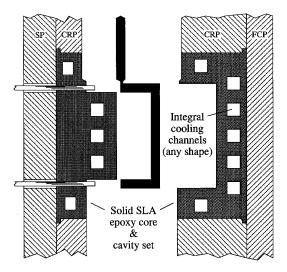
Solid epoxy cavity/core insert set produced directly with the SLA process. Cooling channels of various geometry and ejector pin holes can be incorporated into the model. Strength and heat transfer are limited with this approach.
